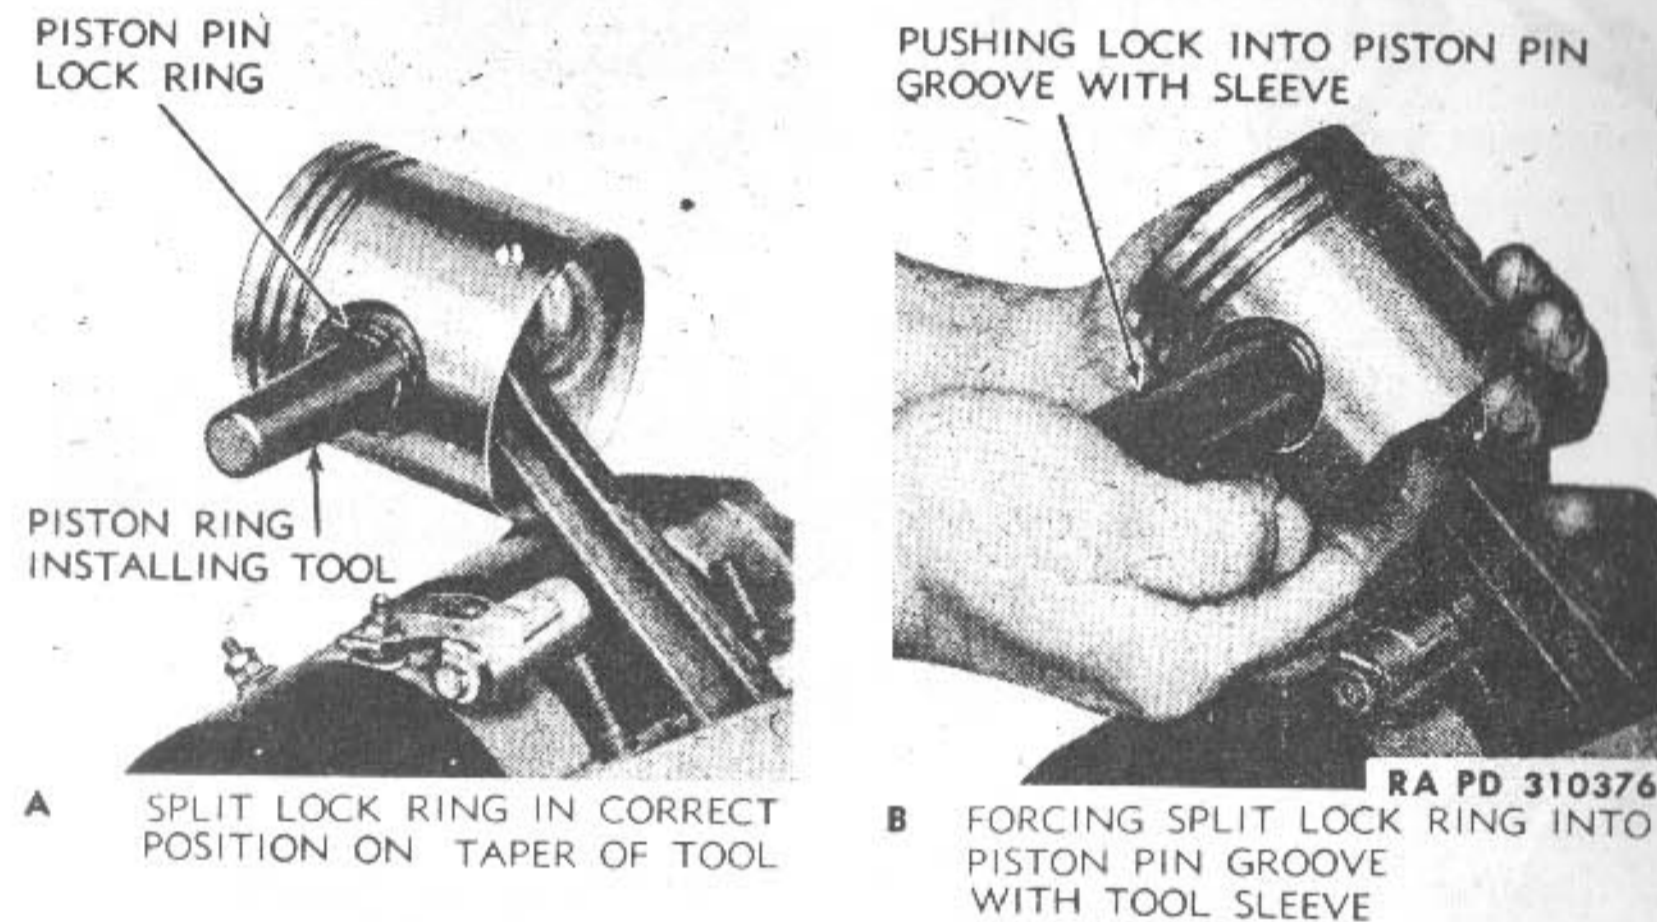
Installing Piston Pin Lock Ring with Tool (41-T-3260)
